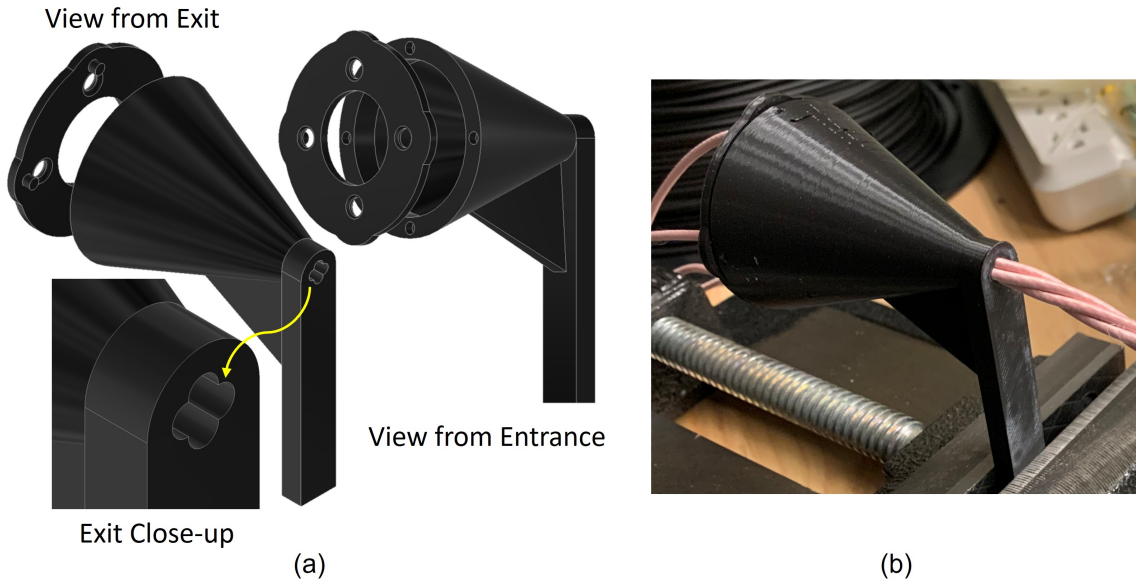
3D printed funnel fixture for constructing pre-formed Litz bundles.
